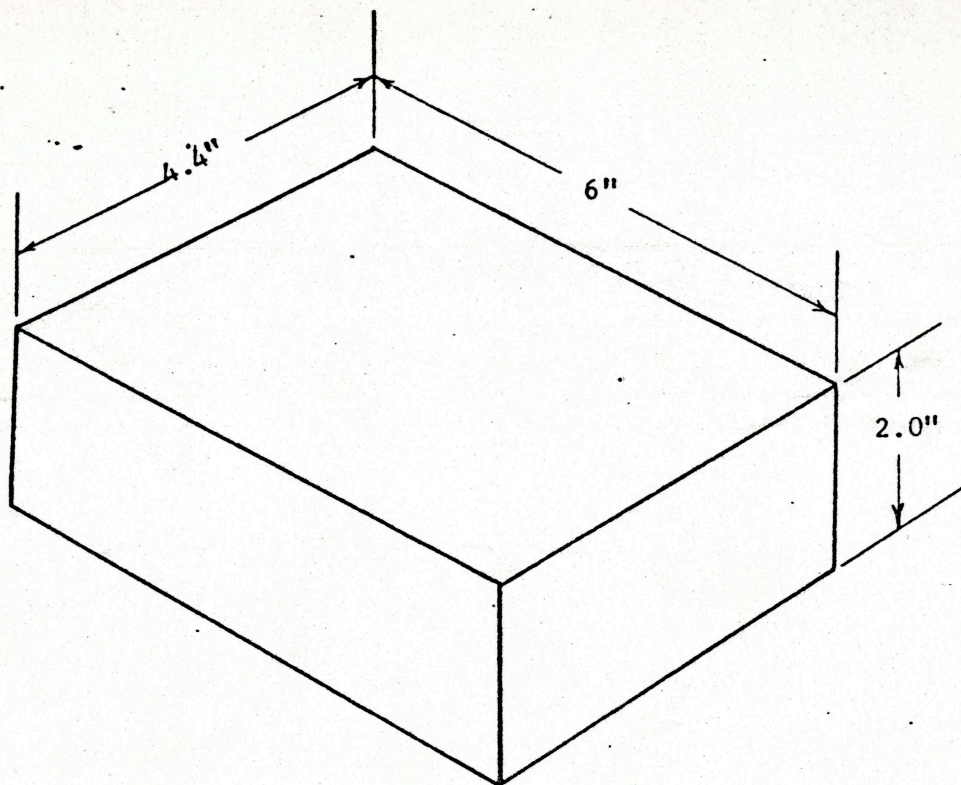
Cap Assembly - Stowed Dimensions (43 items)
